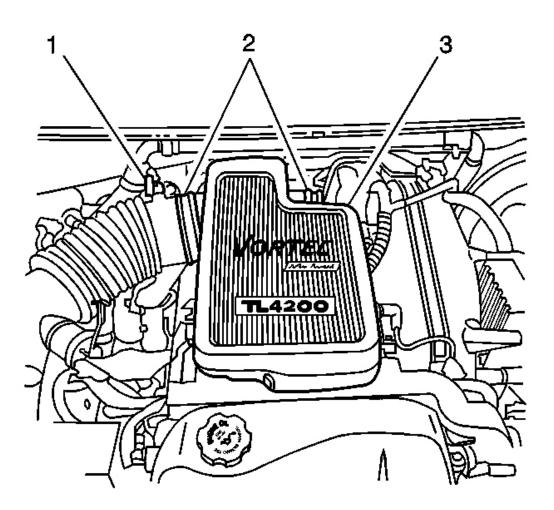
View Of Engine Bolts & Air Cleaner Outlet Resonator Courtesy of GENERAL MOTORS CORP.
